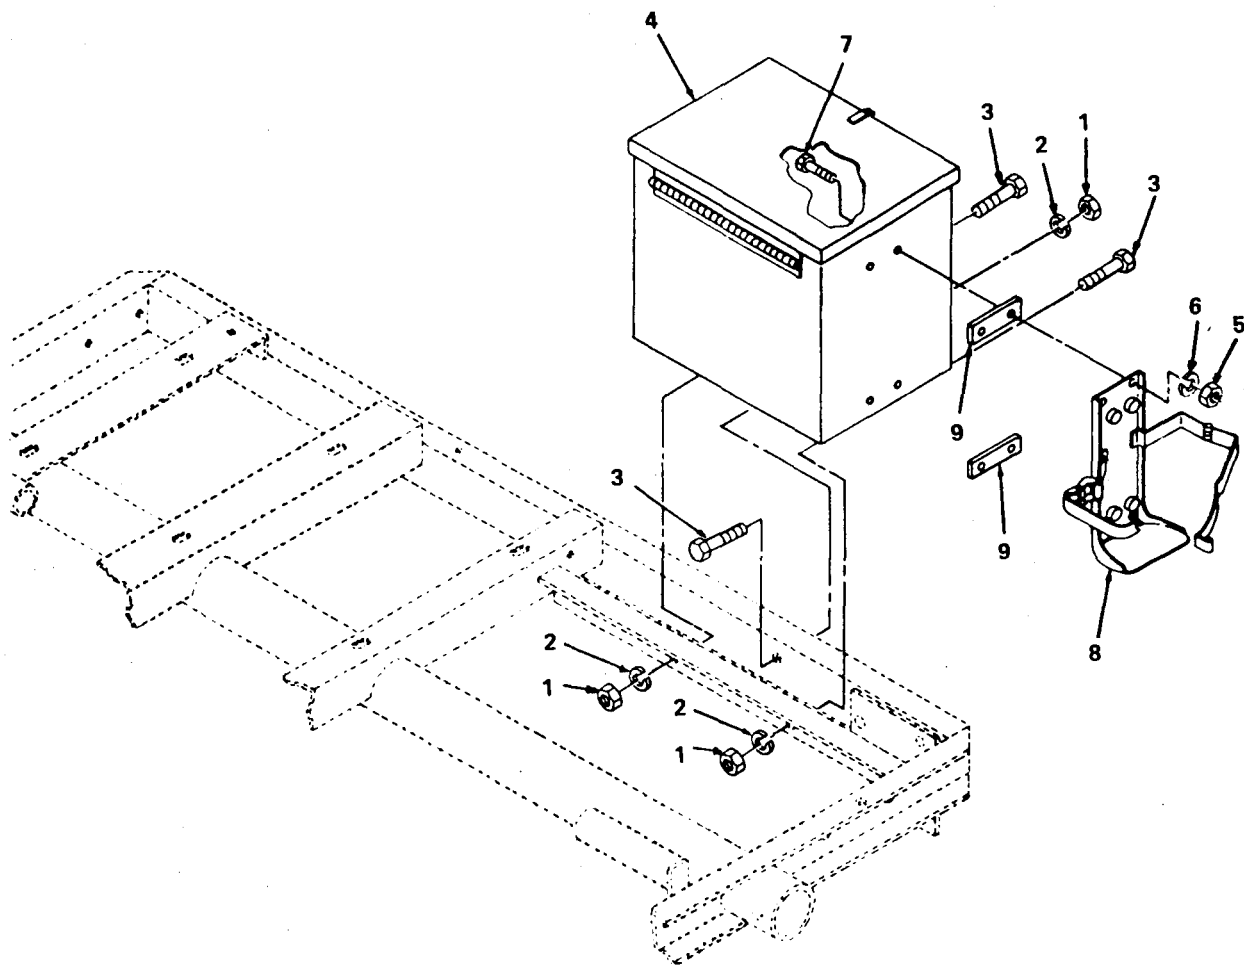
Tool Box Assembly and Fire Extinguisher Bracket.
